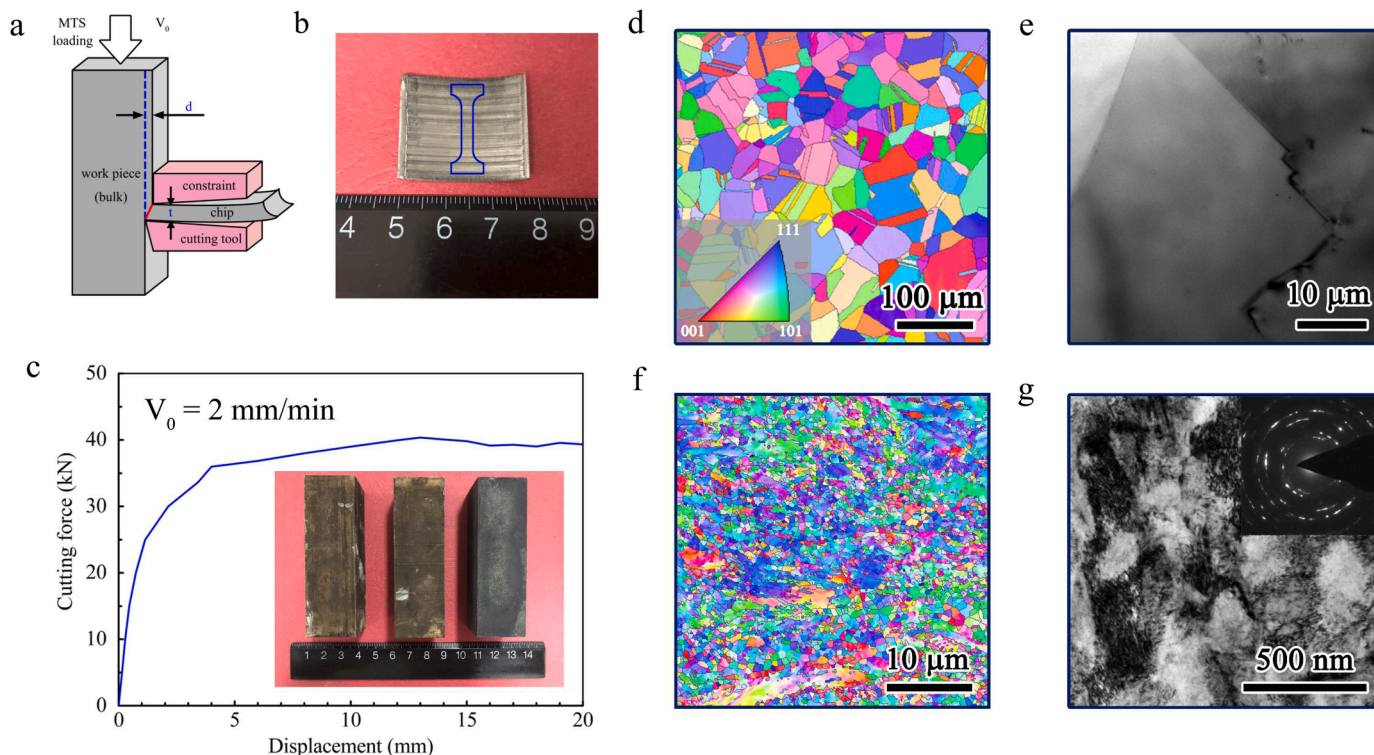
(a) Schematic diagram of experimental equipment for QSEM; (b) a HEA chip after QSEM and the sampling method of tensile specimen; (c) experimental measurements of cutting forces in QSEM, and the inset shows the initial HEA workpieces; (d, e) and (f, g) are the microstructures of the HEA before and after QSEM, respectively.
